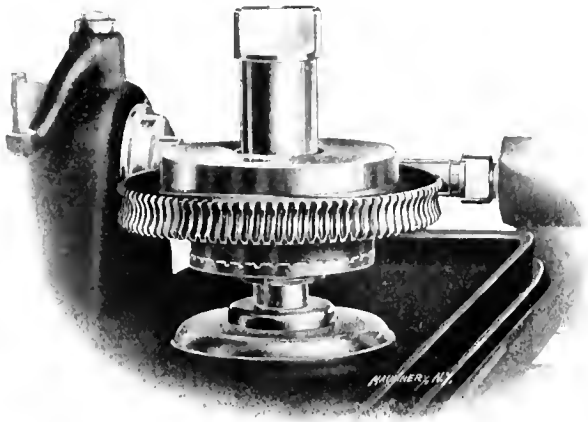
Worm-wheel being finished in Grant-Lees Gear-hobbing Machine.
